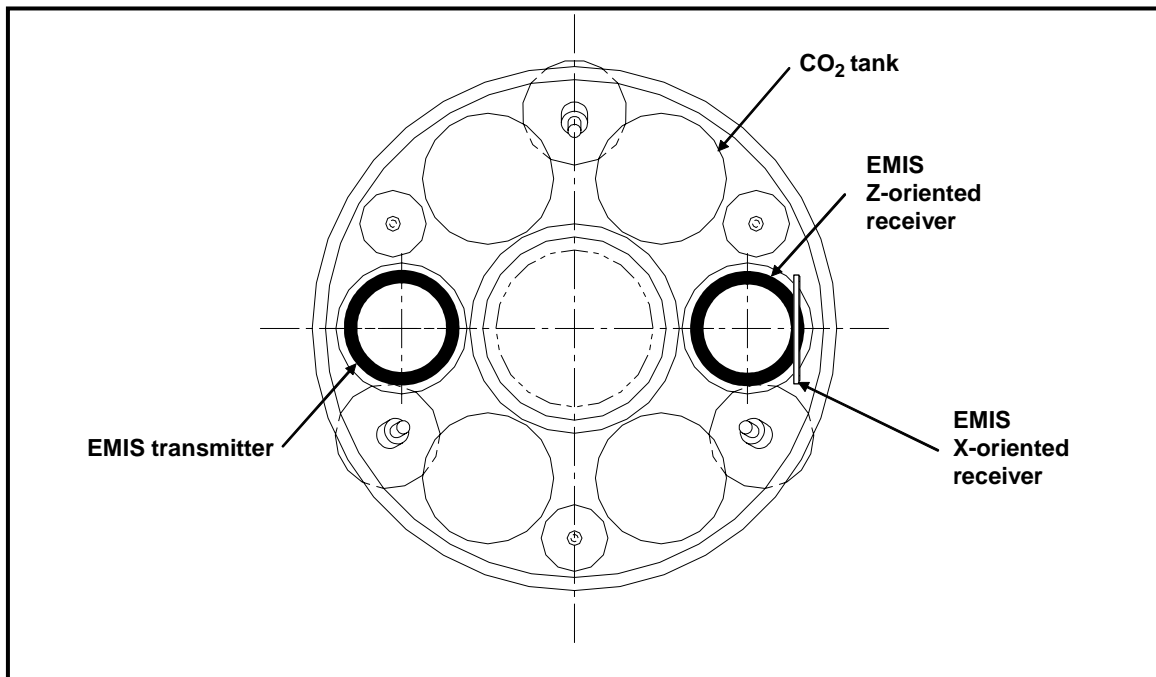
Detailed technical drawing (top view) showing the EMIS transmitter and receivers mounted within the Skimmer (diameter \approx 1m).
